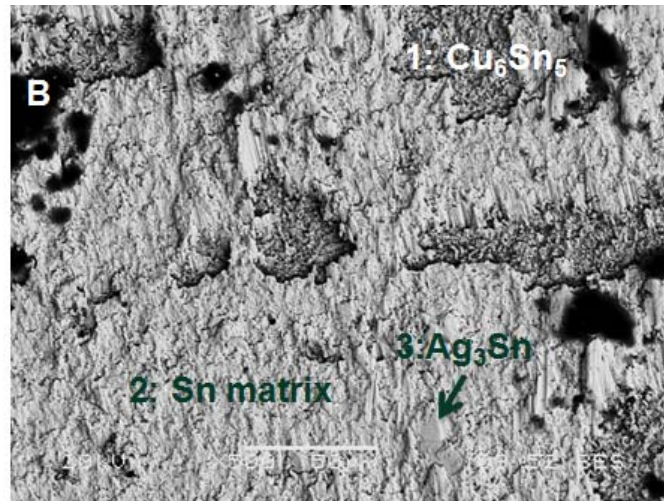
Fractured die back surface of as-reflowed SAC305 joints (200X), with ductile texture shown clearly.
